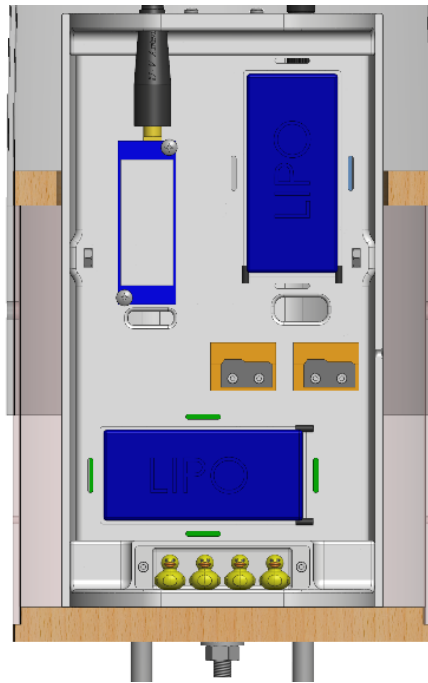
Section view of STEMCRaFT inside of the Nose Cone showing the location of pull-pin switches.
